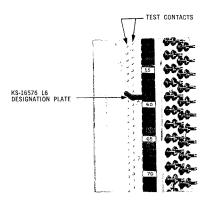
Designation Plate Installed Over Test Contact Terminals
